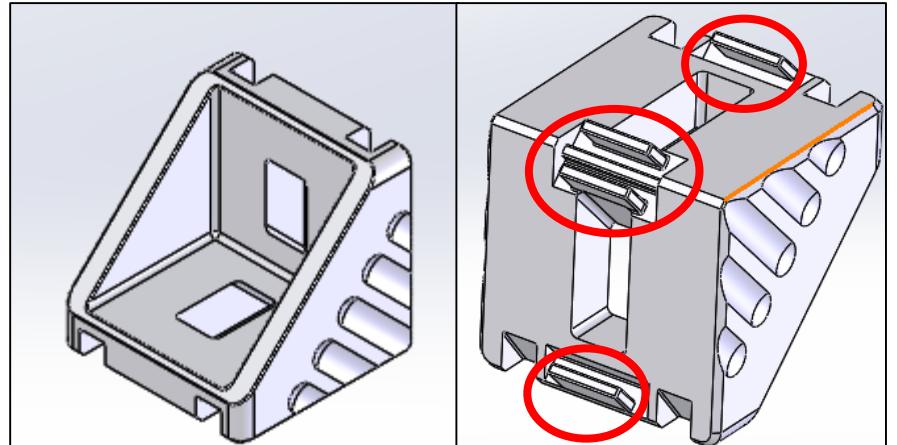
CAD model of a standard bracket for Bosch Rexroth profile with extrusions for sliding into the groove of the profile
